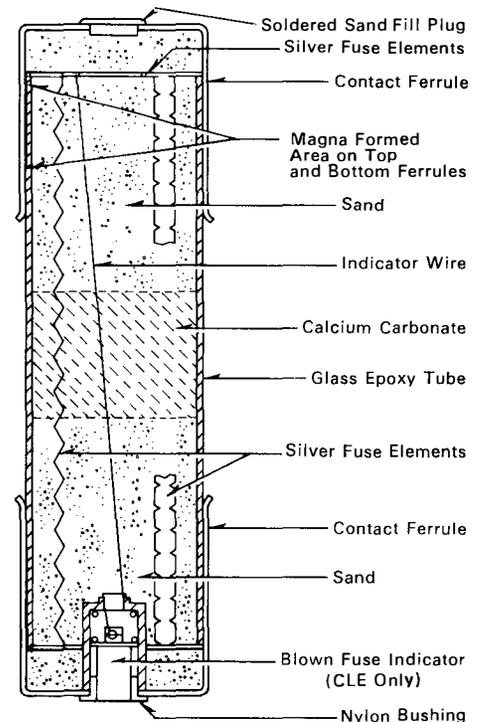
Cross-section drawing showing component parts of a type CLE-1 fuse unit.
